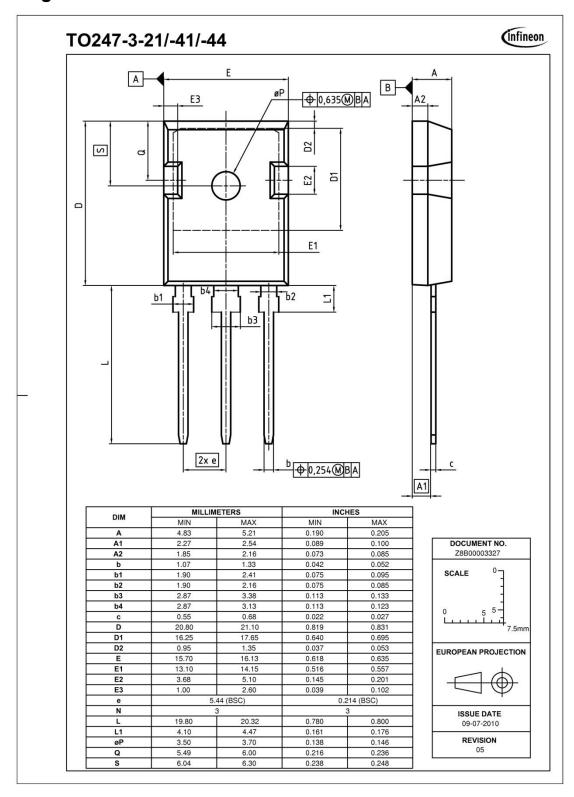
Outlines PG-TO247-3, dimensions in mm/inches
